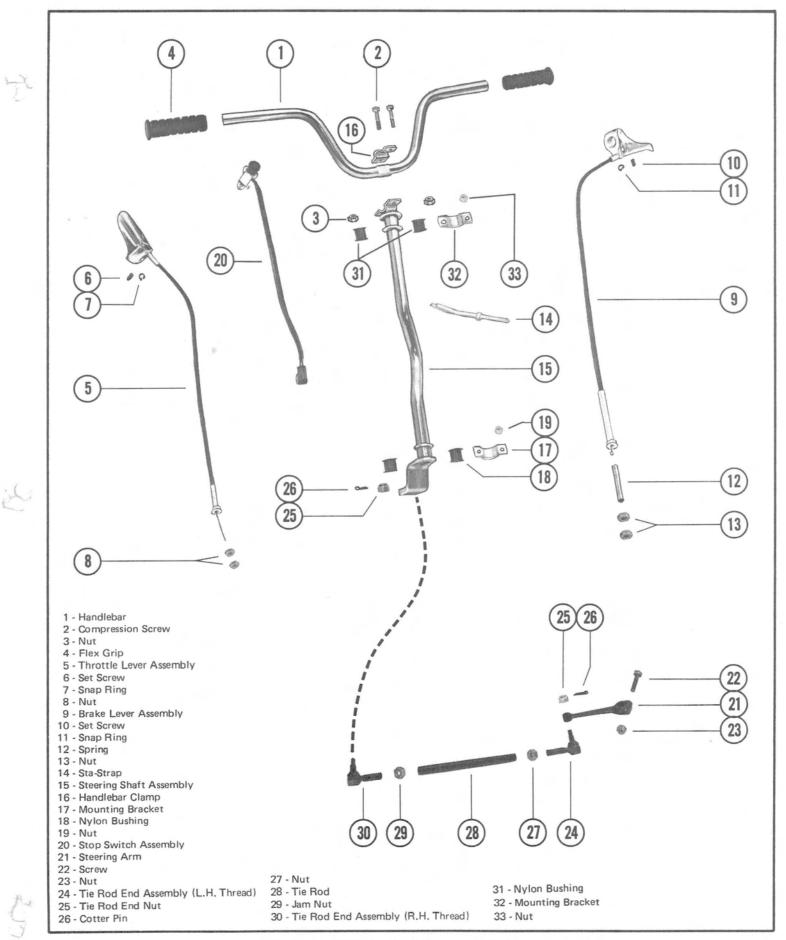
Tie Rod and Steering Shaft Component for Hurricane (644cc)
